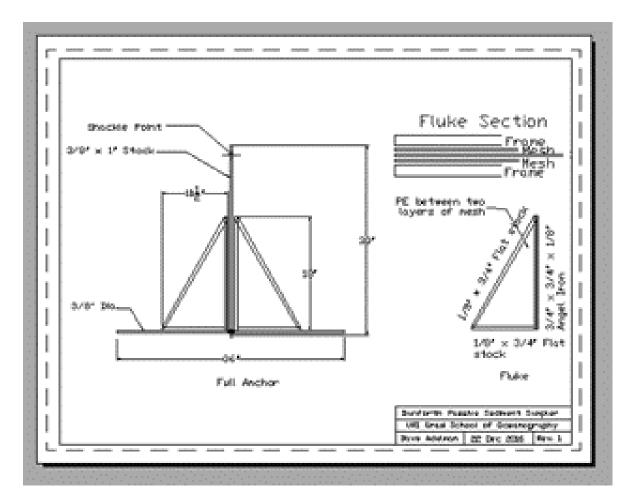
Technical Design of Modified Danforth PE In Situ Multisampler, Where Both Flukes Will Hold Passive Sampler PE Sheets.
